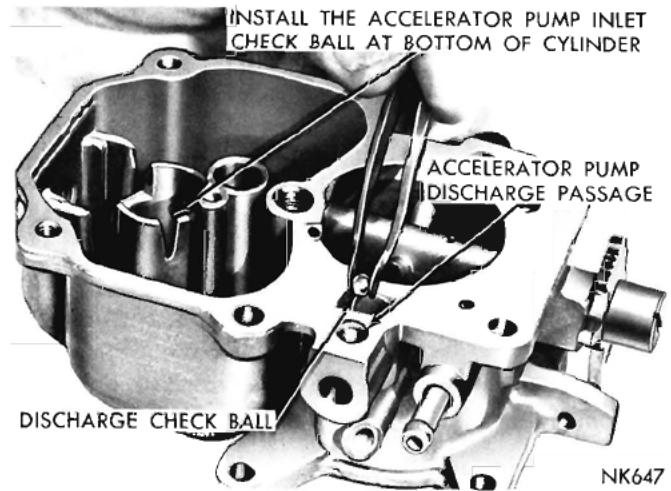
Installing Accelerator Pump Discharge and Intake Check Balls
